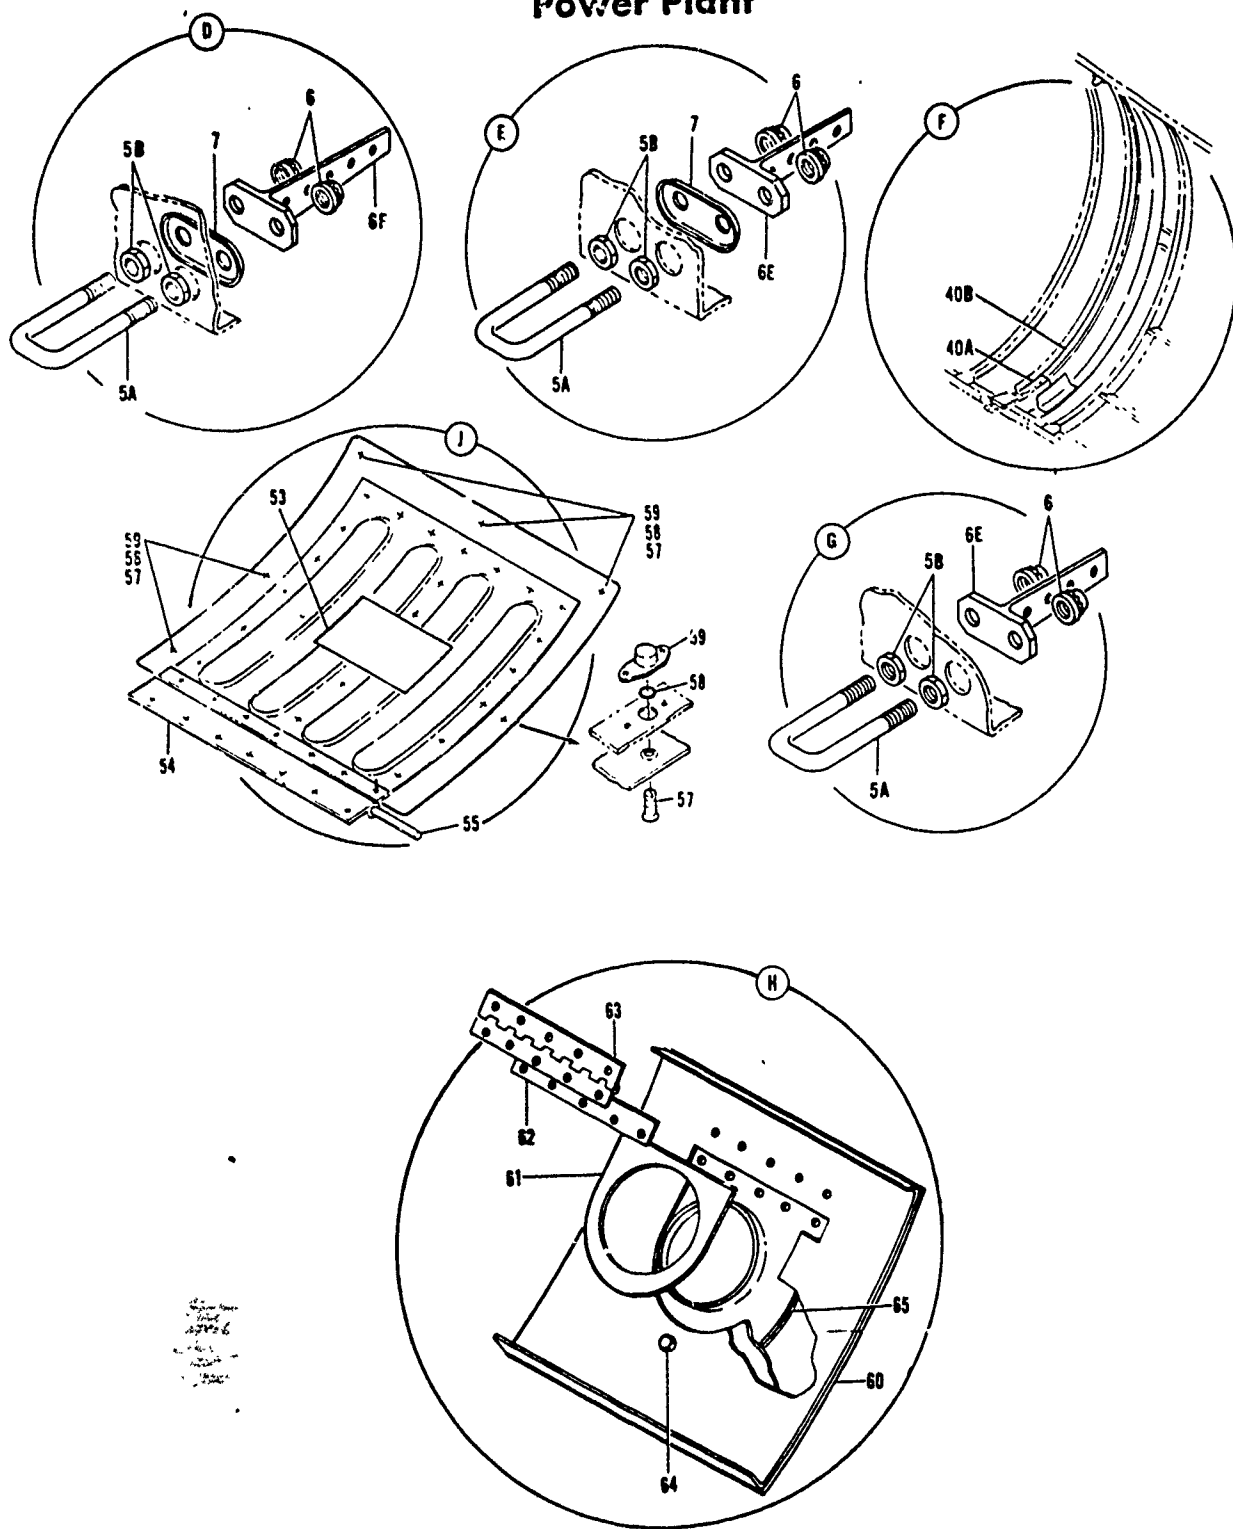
Engine Nacelle Right Hand Side Cowl Panel Assembly (Sheet 2 of 2)
